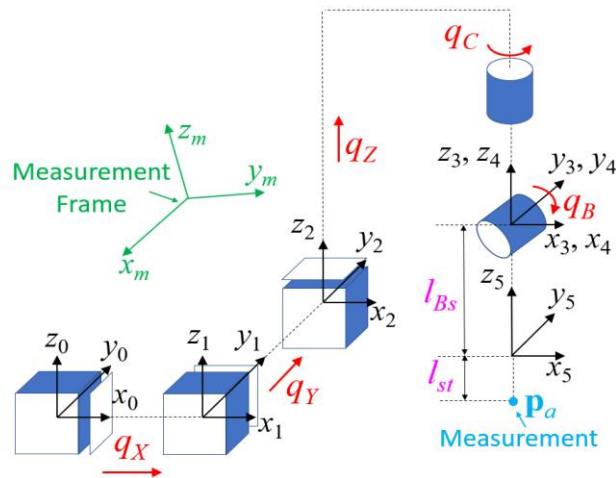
Schematic of industrial five-axis machine tool kinematics.
